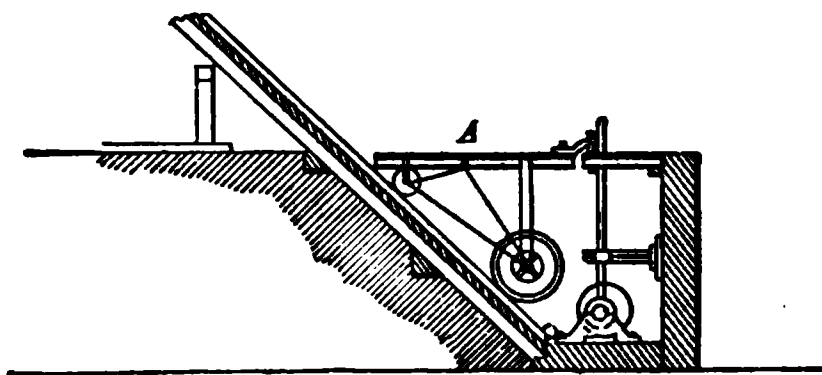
Inclined Plane for Elevating the Charge to Furnace Mouth.
